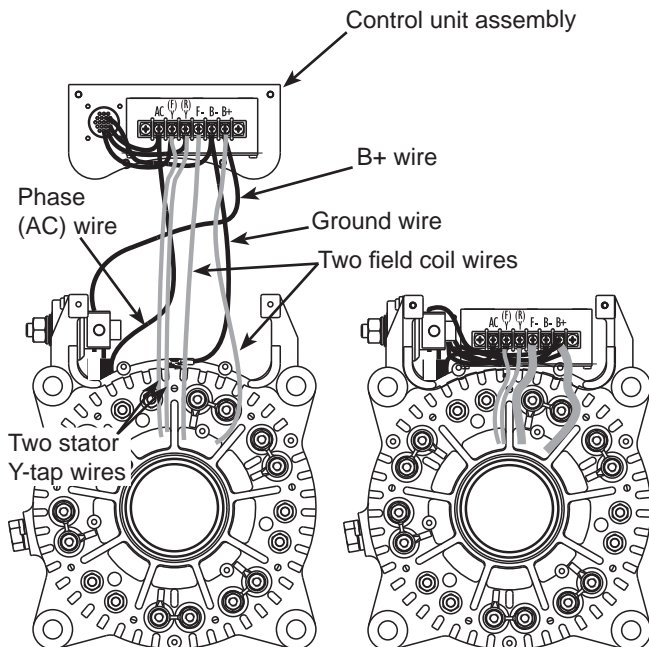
Replacing Control Unit Assembly and/or B+ Terminal on N1388 Alternator
